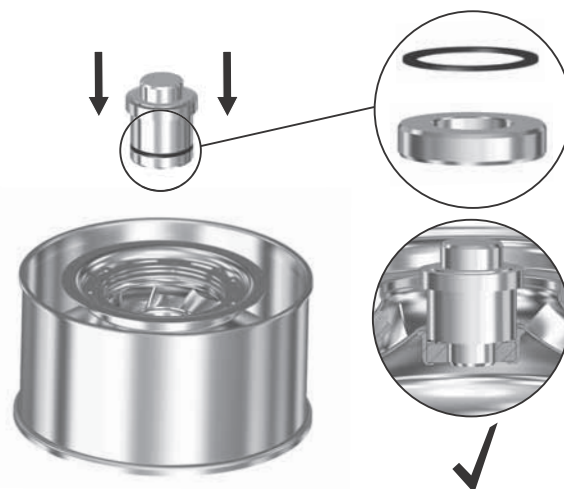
Installing the bush (47c) and retaining ring (47d) with service tool K
